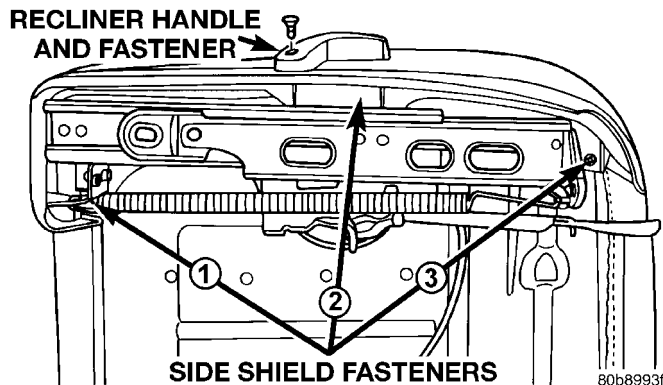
BOTTOM VIEW OF SIDE SHIELD AND TIGHTENING SEQUENCE
